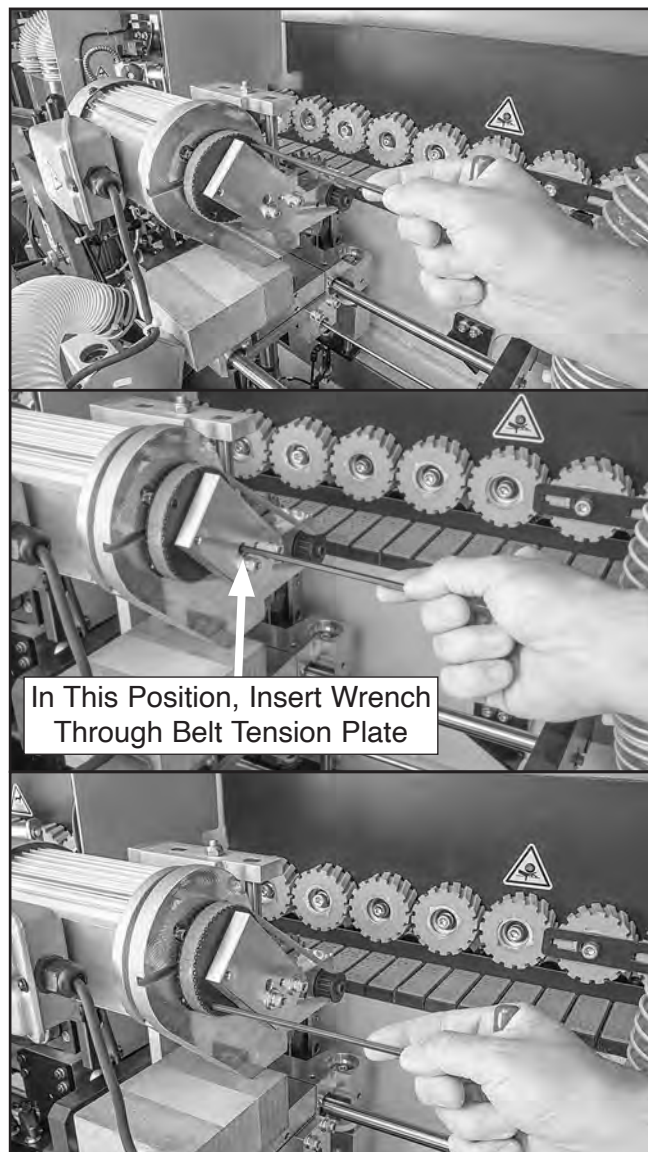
Loosening remaining end trimmer motor mount cap screws.
